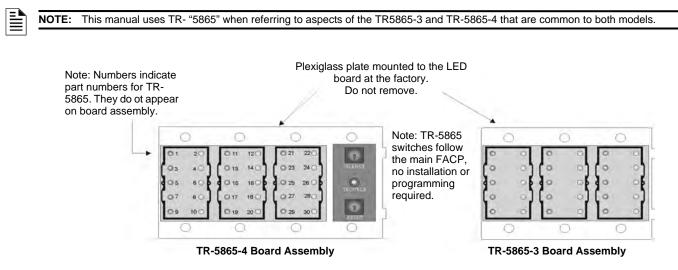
TR-5865-3 and TR-5865-4 Assembly (front view)
